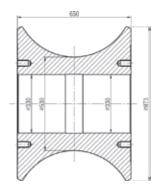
The drawing of sizing roll of world's biggest Ø660HFW/ERW welding pipe mills
